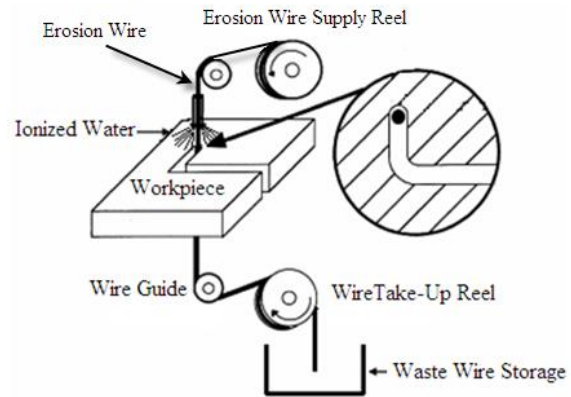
The Wire-Cut Electrical Discharge Machining (EDM) Process [6,7].
